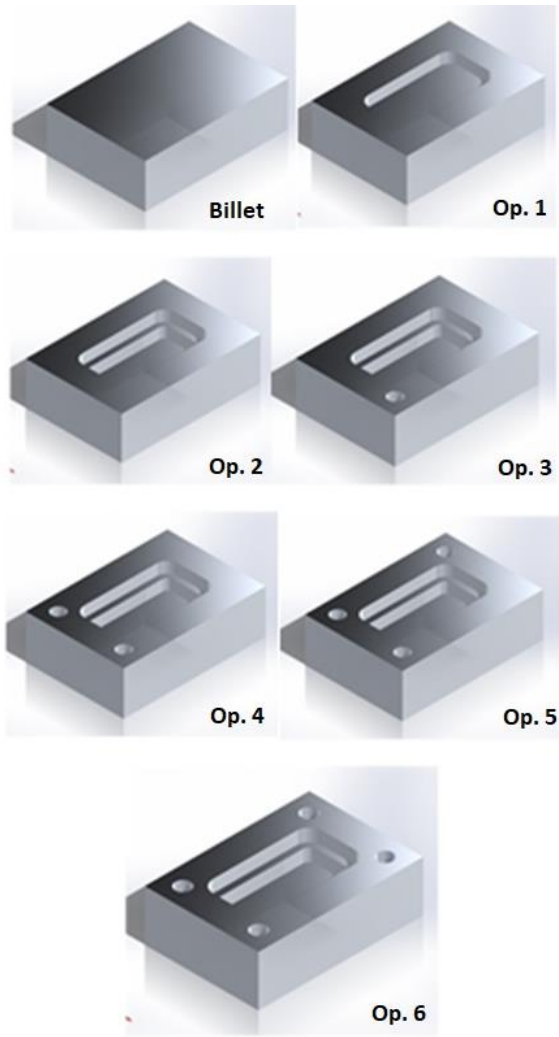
Representation of the billet, and the machining operations 1 through 6 of the workpiece
